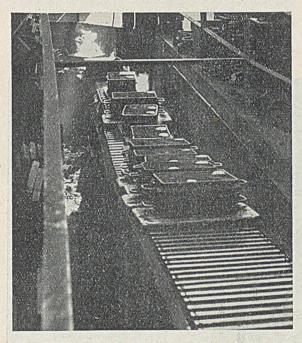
Cast-up Moulds descending on the Motorised Slat-type Conveyor to the Tunnel beneath Part of the Foundry Floor.
